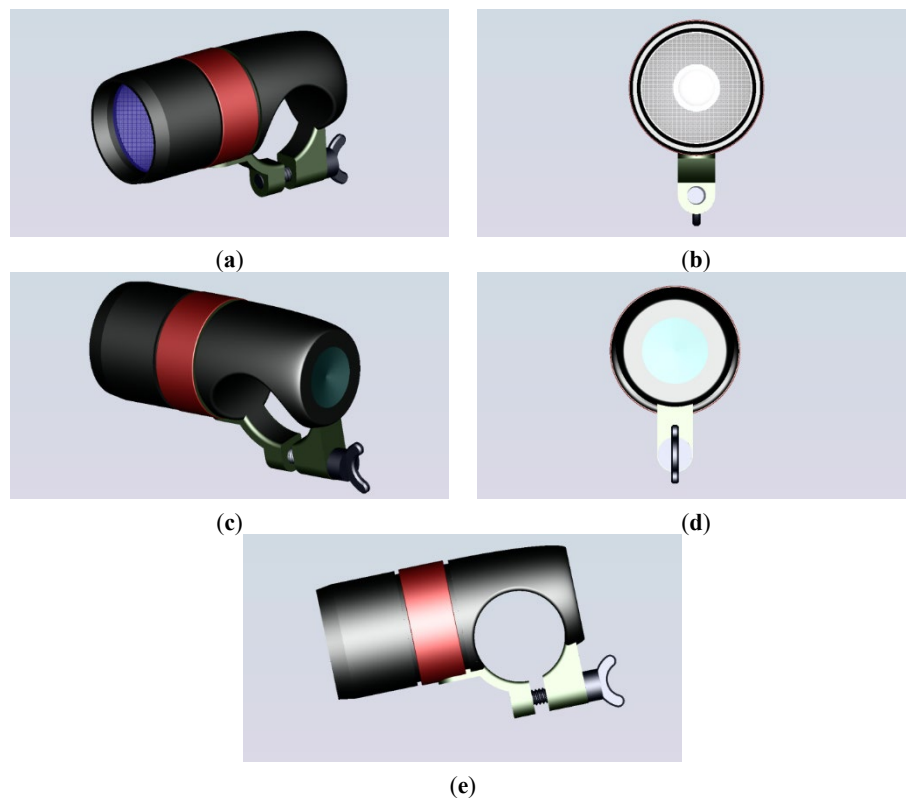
Design of the light lamp of a cylindrical shape. (a) Upper oblique front view, (b) front frontal view, (c) upper oblique rear view, (d) rear frontal view, and (e) side view.
